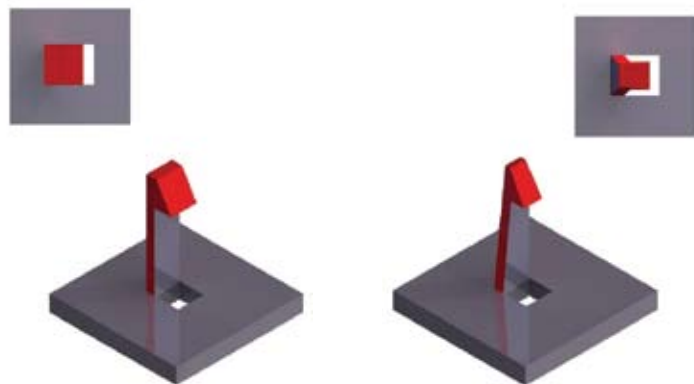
Illustration of a clip feature produced using telescoping shutoffs. At left is top view and angled view showing how the lack of draft results in sliding parallel mold surfaces. At right, top view and angled view show how draft yields improved mold shutoff surfaces.
